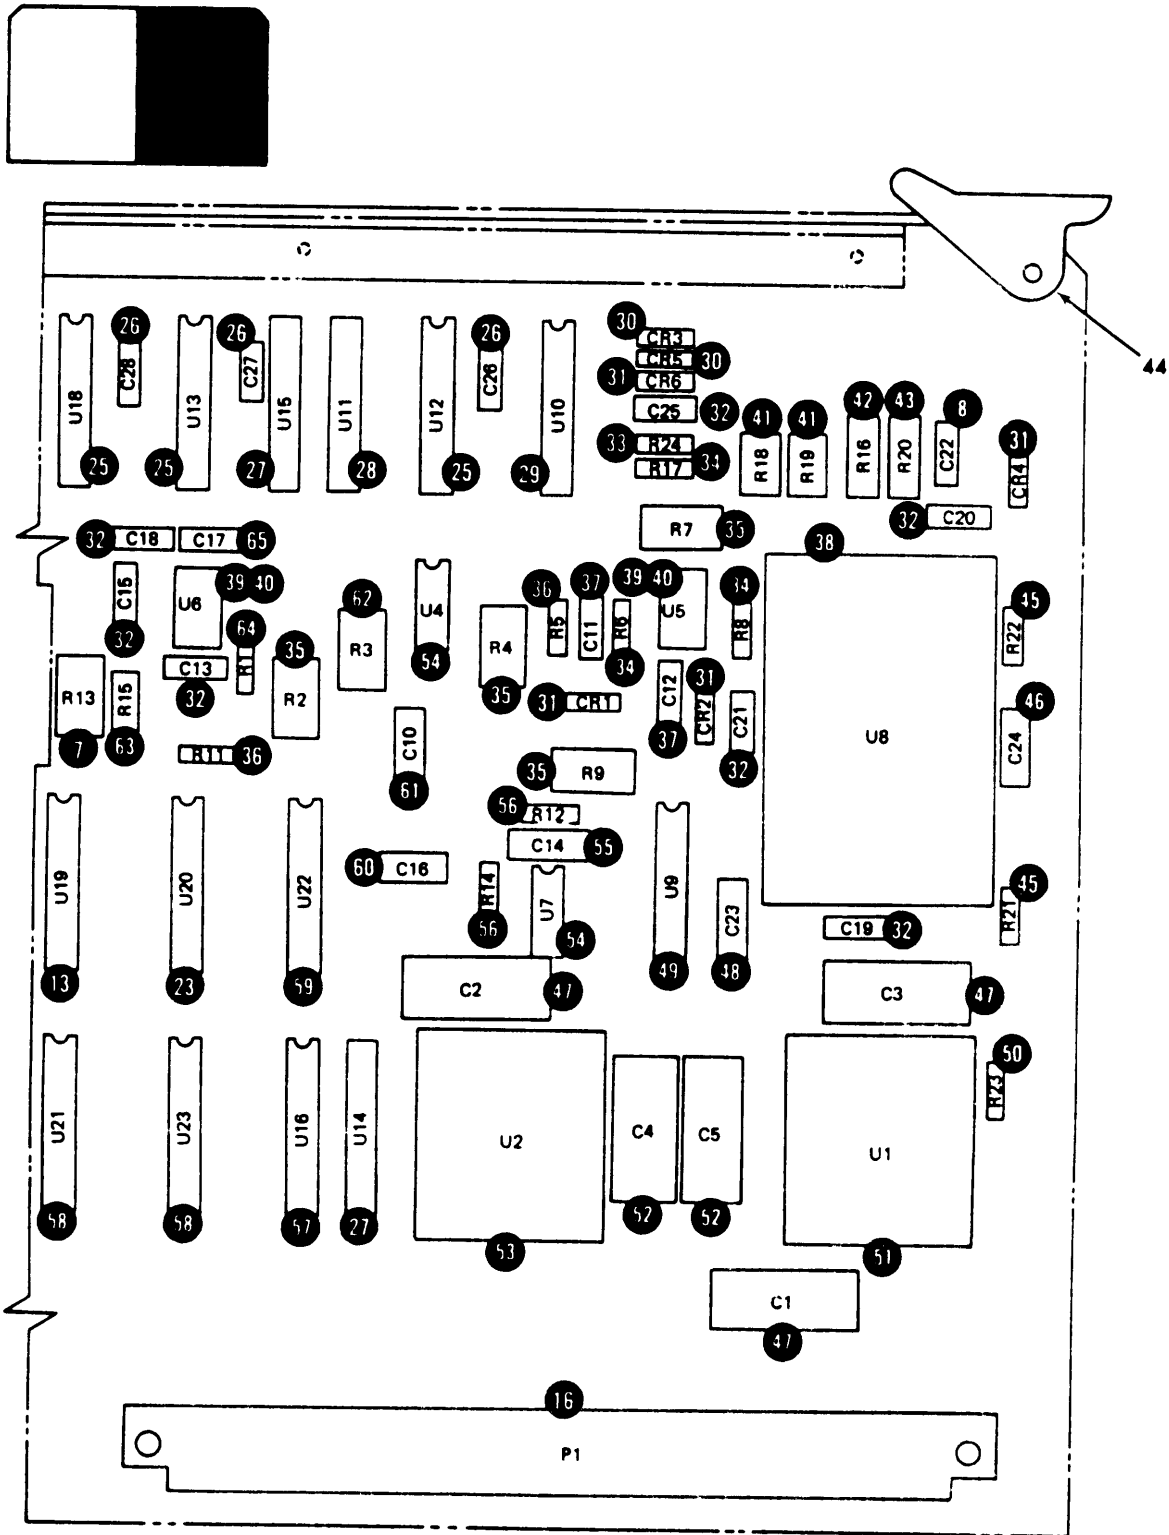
DIGITAL VOLTMETER CIRCUIT CARD ASSEMBLY .44
